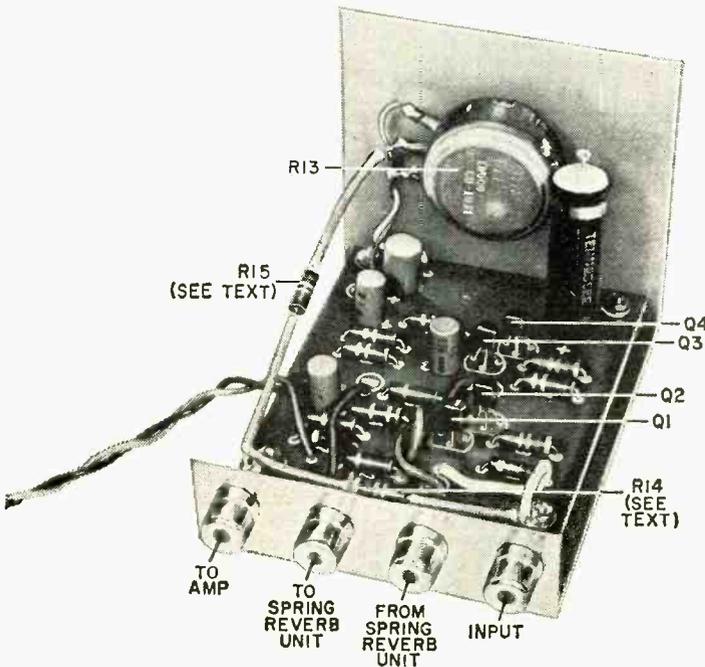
The finished board can be mounted on a metal chassis with the external connections completed as shown here. Short spacers isolate board from chassis.
